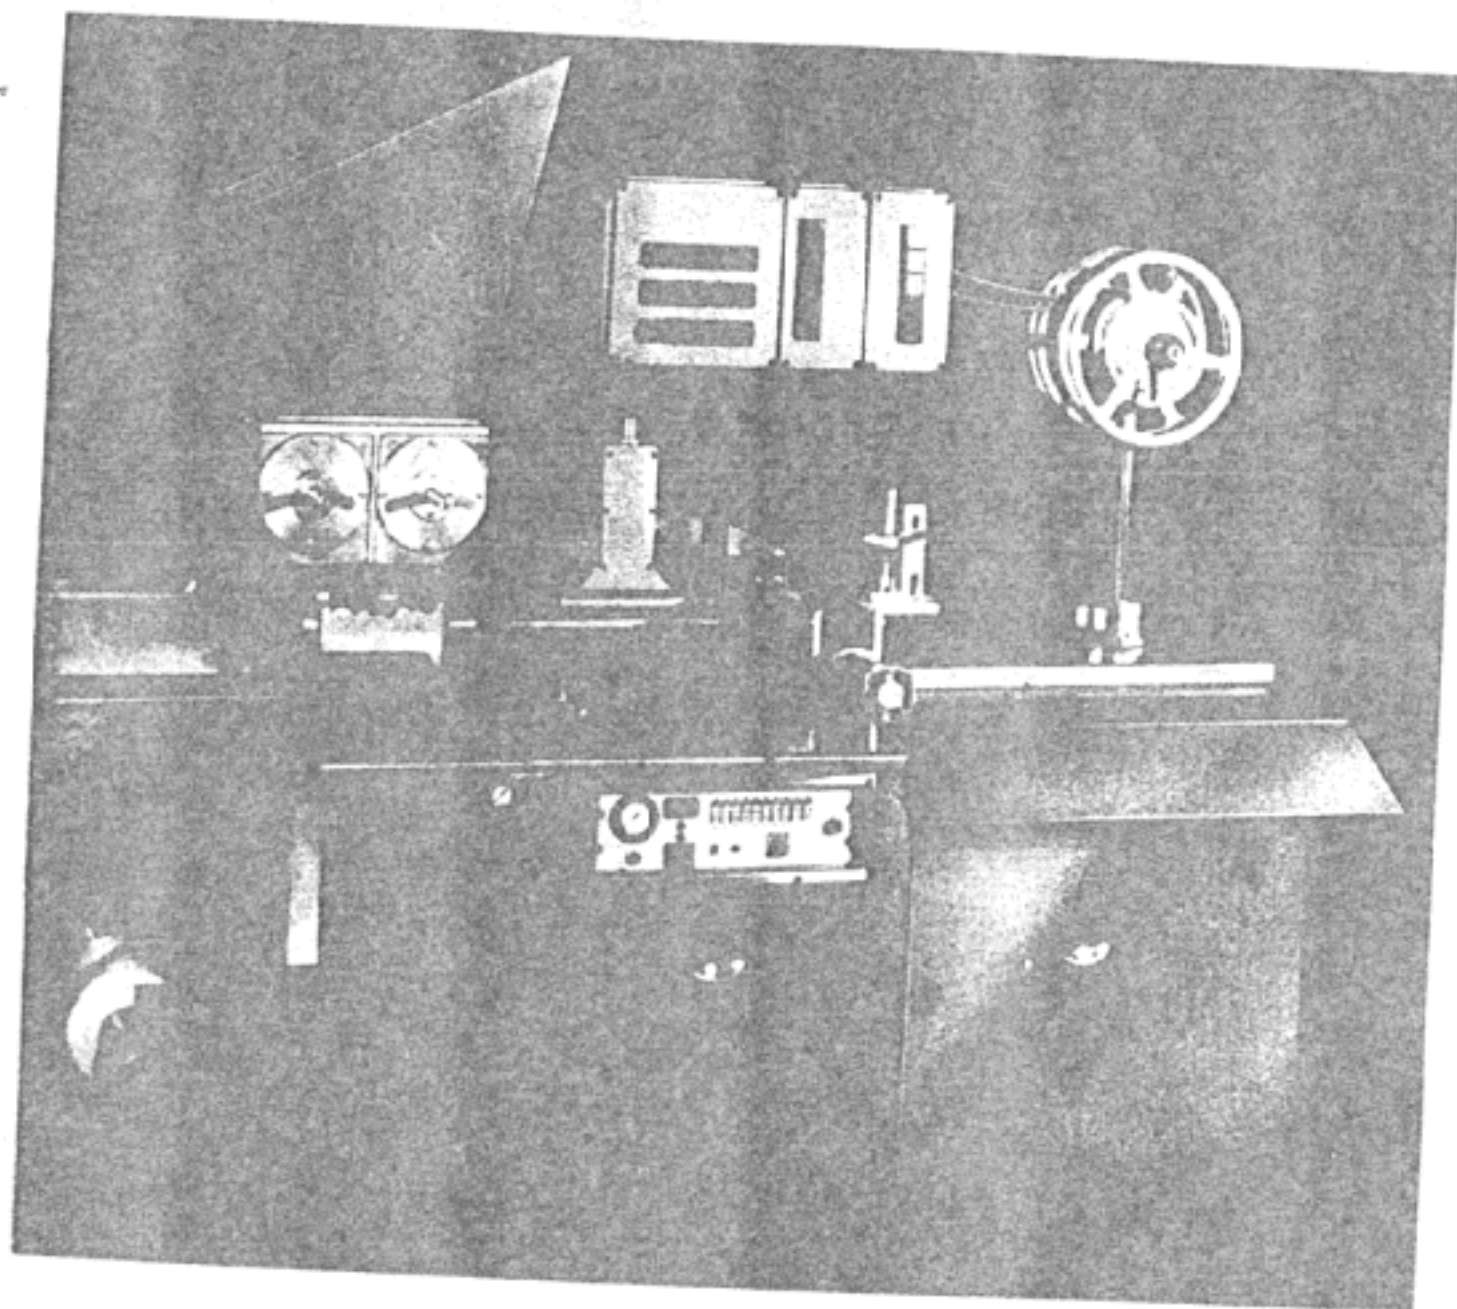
Explosives packing machine for large diameter cartridges (Courtesy Maschinenfabrik Fr. Niepmann G.m.b.H. and Co., D-582 Gevelsberg, FRG).
